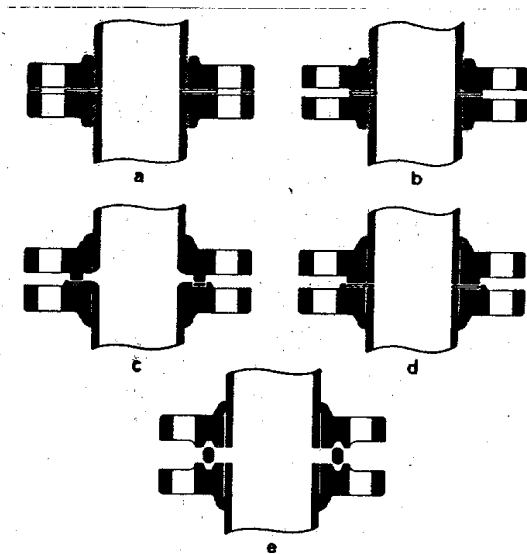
Methods of facing flanges: (a) plain face; (b) raised face; (c) tongue-and-groove face; (d) male and female face; (e) ring joint.
